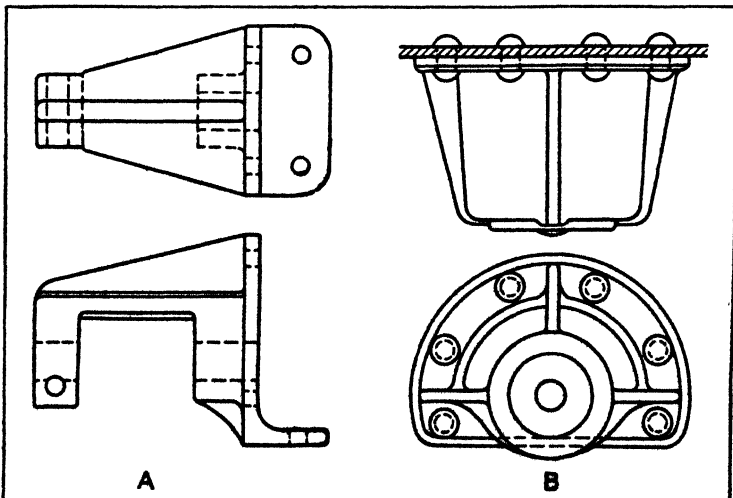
REAR-SPRING FRONT BRACKETS.
